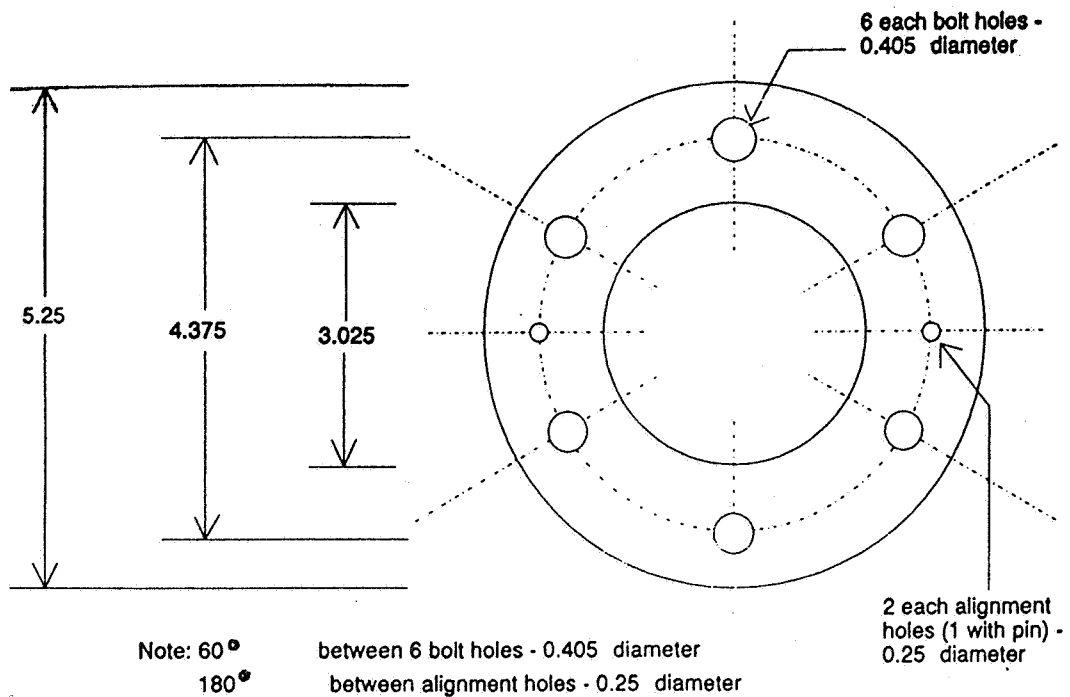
Flange for 76.8 mm (3.025 in) diameter coaxial air-line components (all dimensions in inches).
